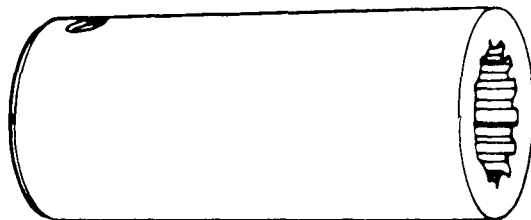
PWA™ 15260 Adjustment Indicator Torque Adapter
